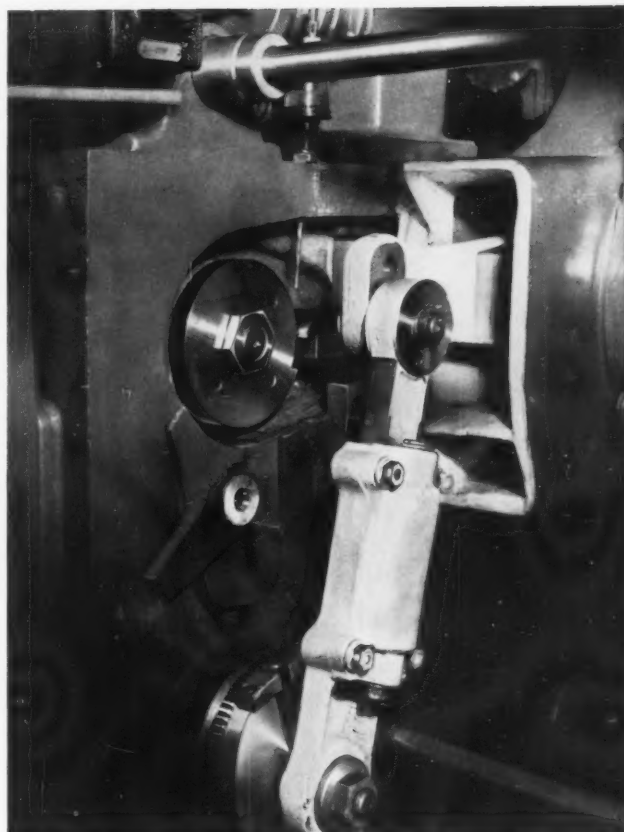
Shaper equipped with a standard face gear attachment has been modified to generate helicoidal surfaces on engine starter jaws.
